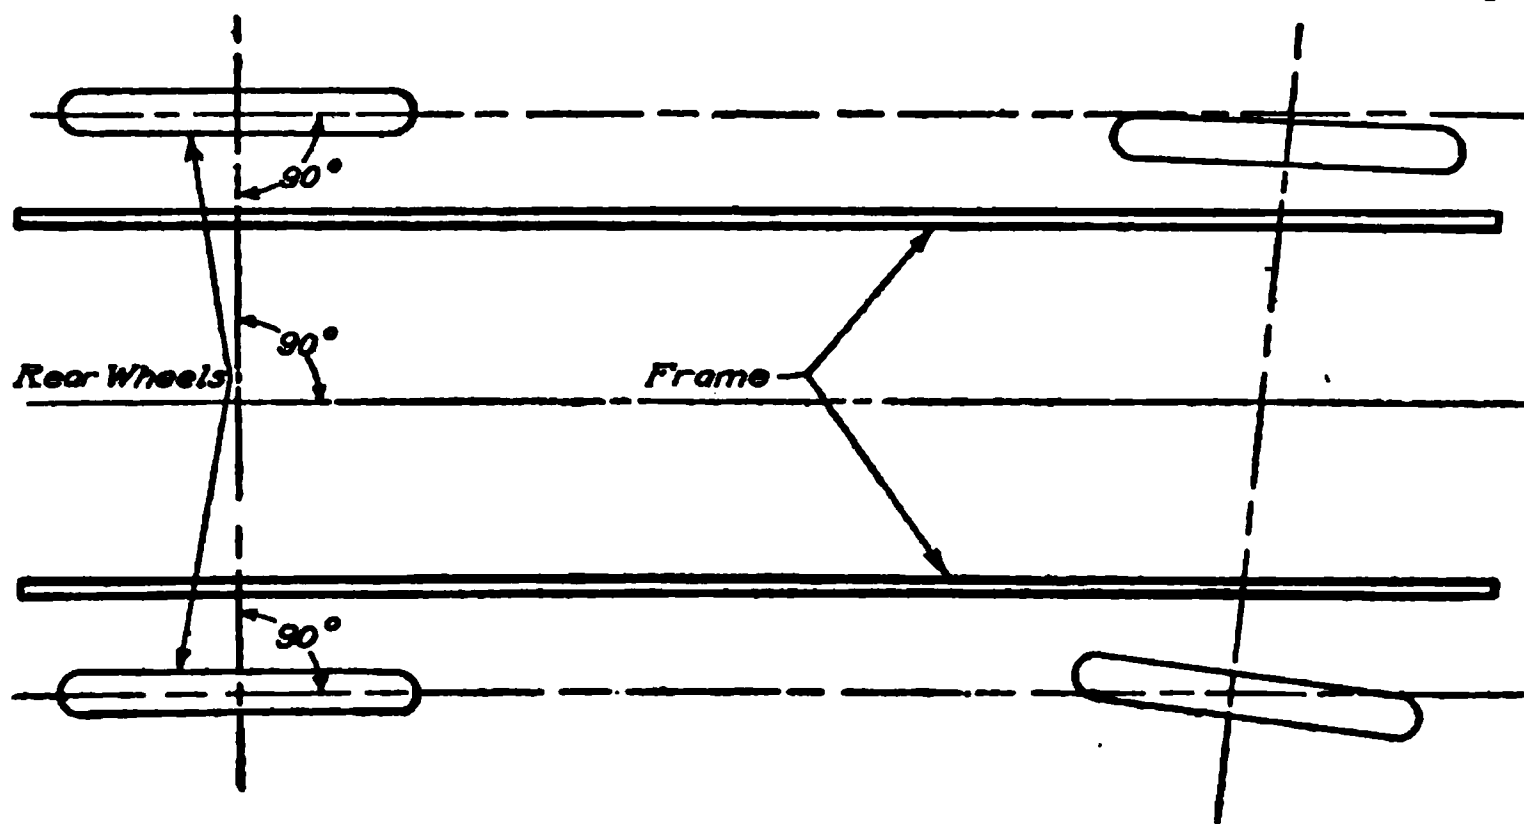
Diagram Showing Front Axle and Wheels Out of True
